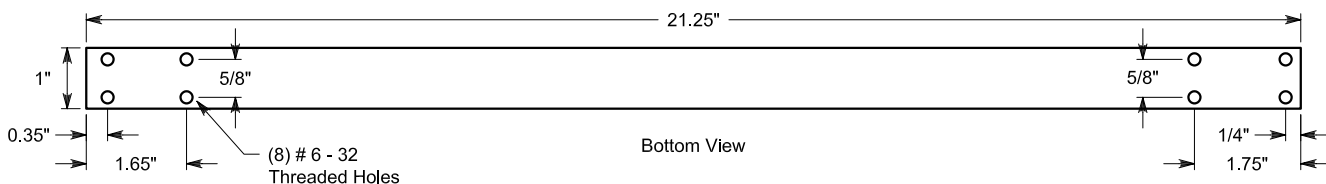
Bottom view of the boom. The top is nearly identical, except that the holes clear #6-32 screws. Use a #36 bit to drill the tapped holes and a #28 bit to drill the holes on top.
